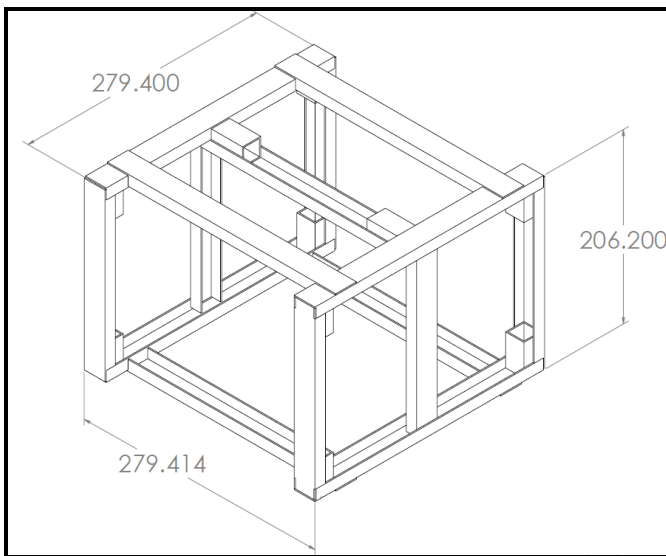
Technical drawing of SEAL Robotics “Mako” vehicle chassis. Dimensions are in millimeters.
